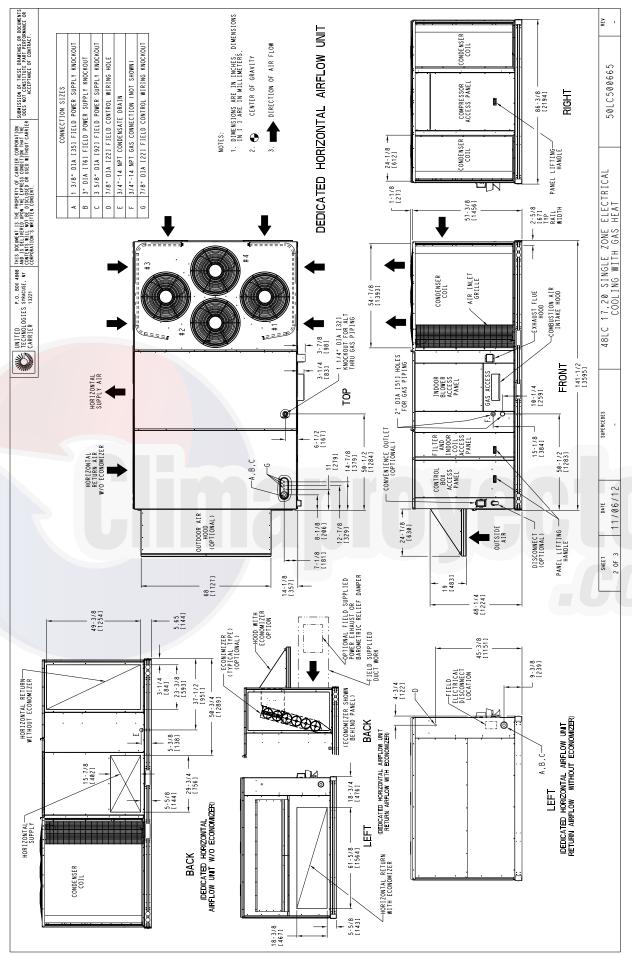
(cont.) - Unit Dimensional Drawing - 17 and 20 Size Units, Sheet 2 of 3
